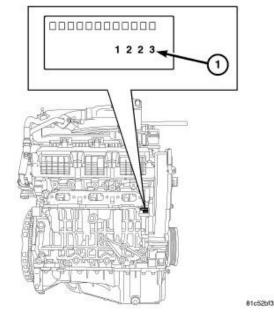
Crankshaft Engine Block Codes Courtesy of CHRYSLER LLC
